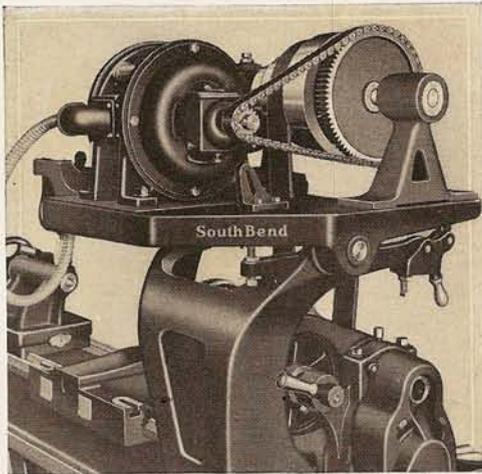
Silent Chain Mechanism with Gear Guard Removed Showing How the Motor Drives the Spindle Cone
